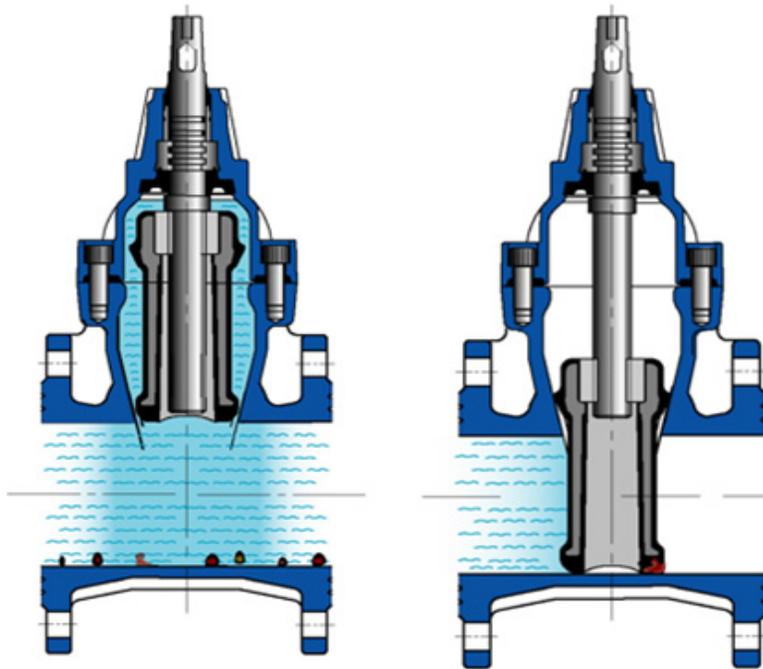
resilient seated gate valve (smooth base on valve bore)
